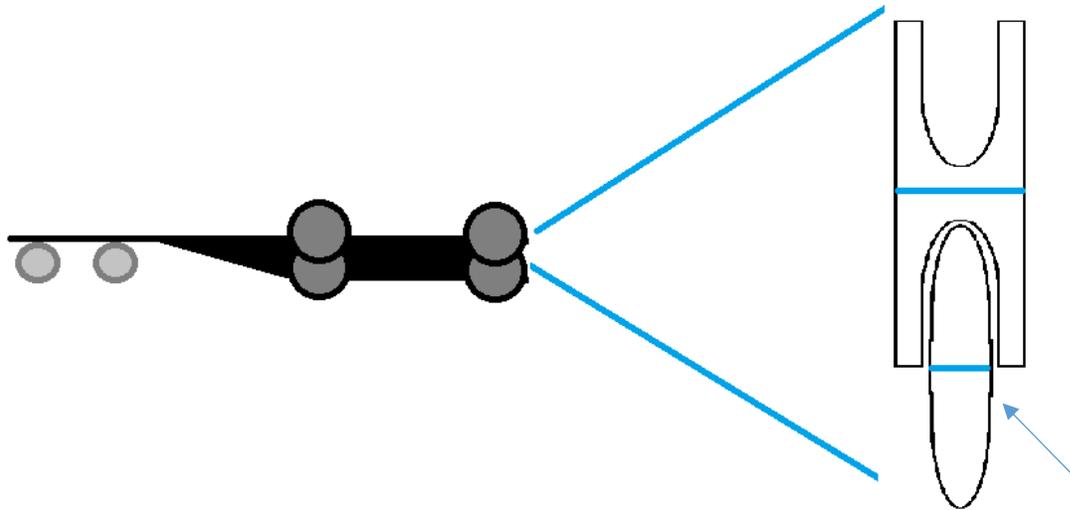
Side view of the first rolling stage: the heated plate is pulled through a series of rollers, the grey layered circles, to manufacture the U-shape of the inner rim. On the right a cross section of a rolling station with an arrow pointing to the extra indentation for bonding. The blue lines are the axis of the rollers.
